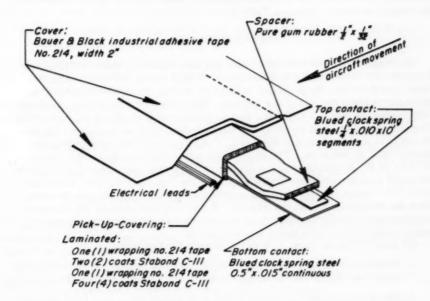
DESIGN DETAILS OF THE DETECTOR TAPE.
